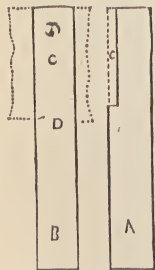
UPRIGHTS IN FRONT OF BENCH.
